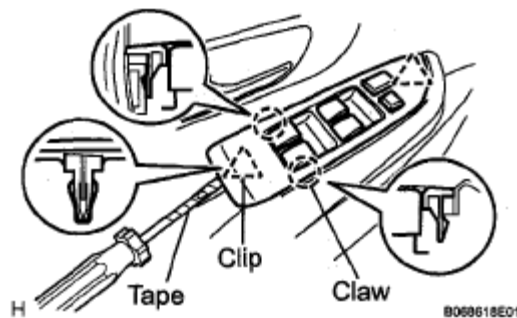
Identifying Power Window Regulator Master Switch Claws And Clips
